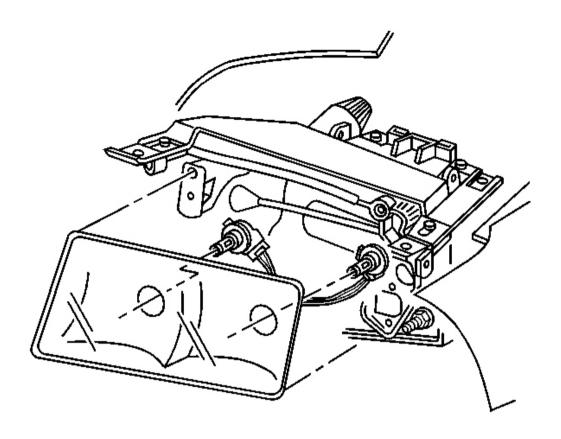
Headlamp Bulb/Socket Electrical Connectors Courtesy of GENERAL MOTORS CORP.
